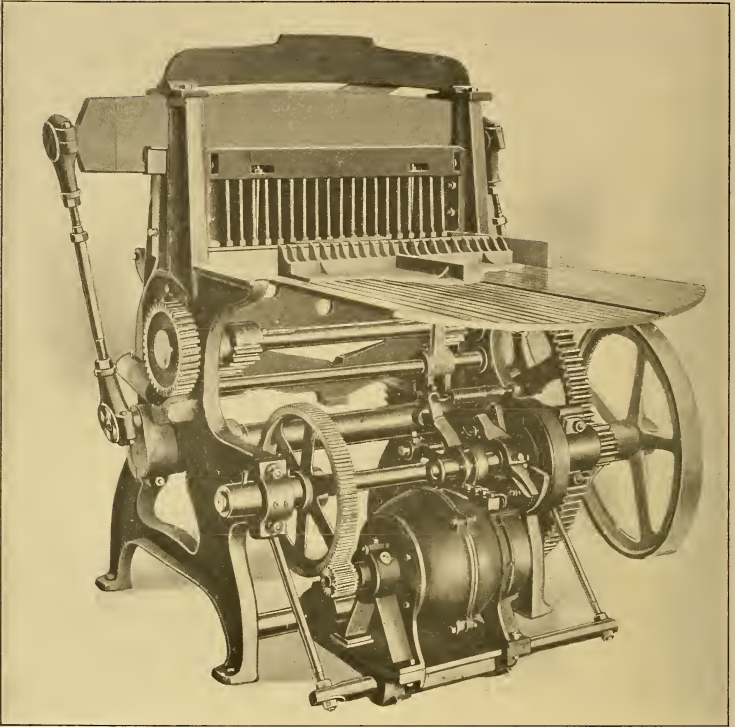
A HEAVY PAPER CUTTER EQUIPPED WITH A SPRAGUE ELECTRIC MOTOR
